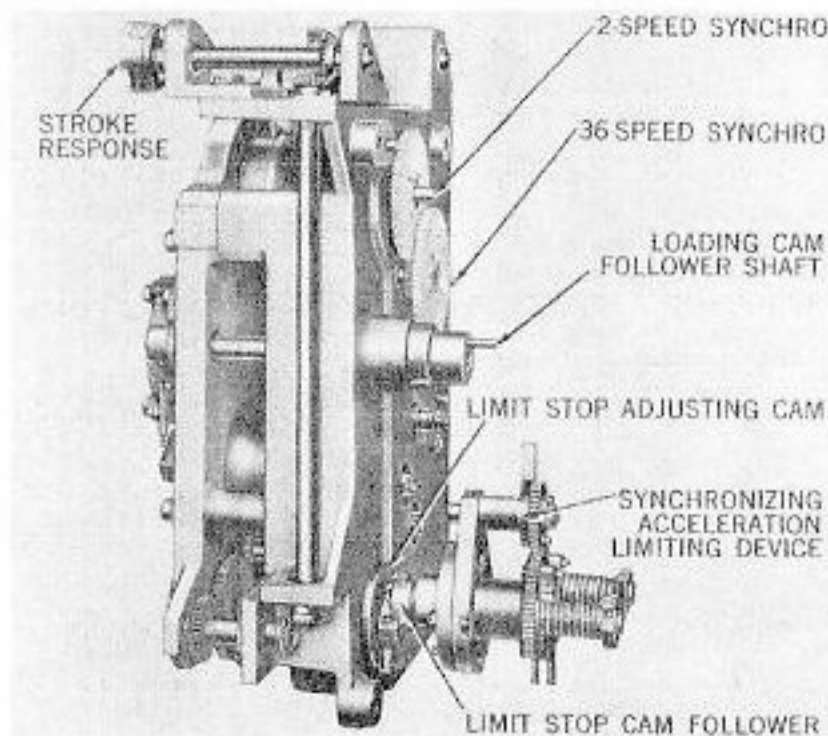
Elevation Receiver-Regulator Mk 10 Mod 0 Gear Train Assembly, Side View
